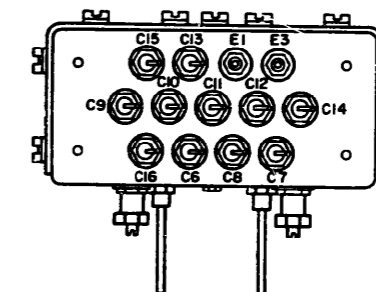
9151 hear power amplifier tune and load assembly A2 parts location
